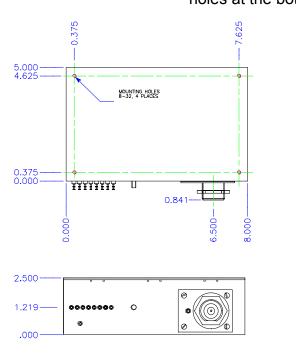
Physical layout showing the placement of mounting holes on the bottom panel of 2592 power supply
